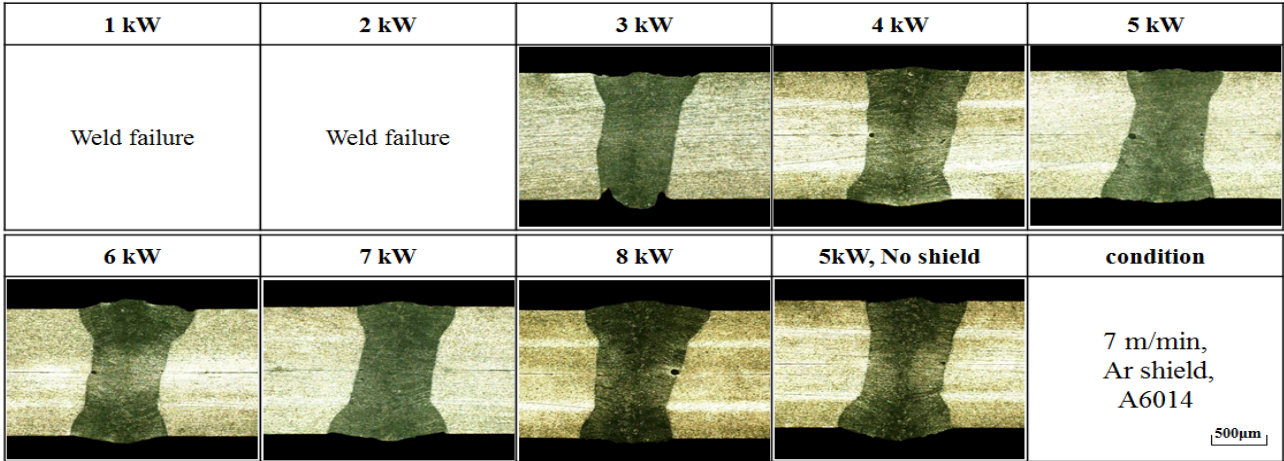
Cross-sectional images of Al6014 laser lap welding by change laser power at 7m/min welding speed
